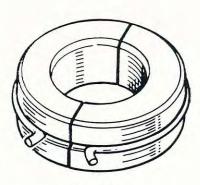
(B25) 61–6124 Crankshaft balance weight.
